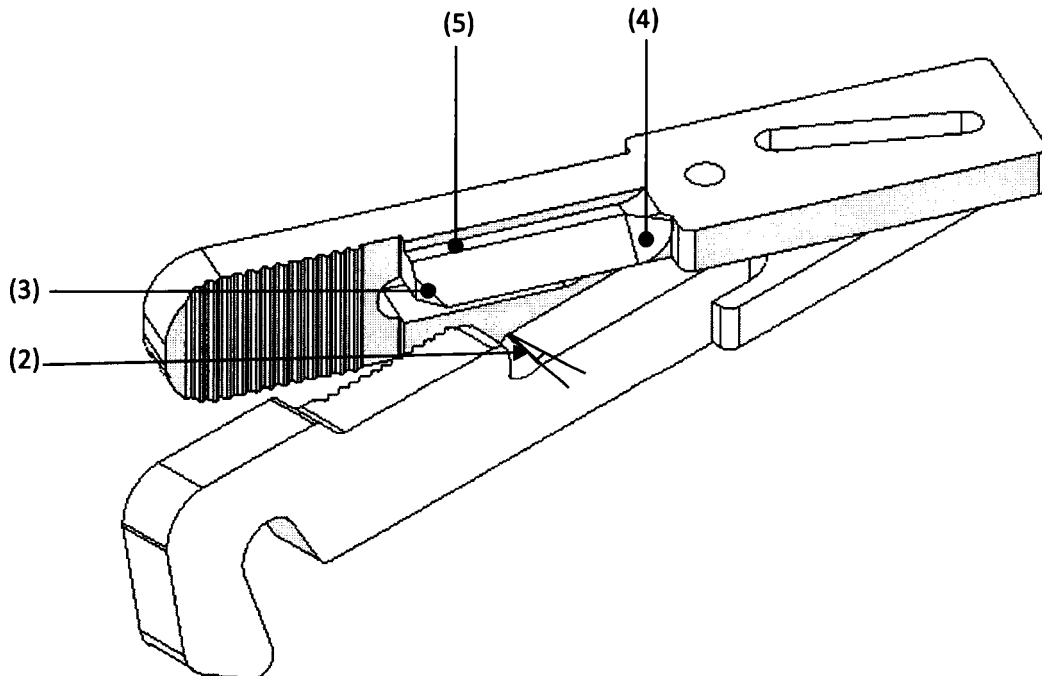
S_U with open blades showing details (2), (3), (4) and (5)
